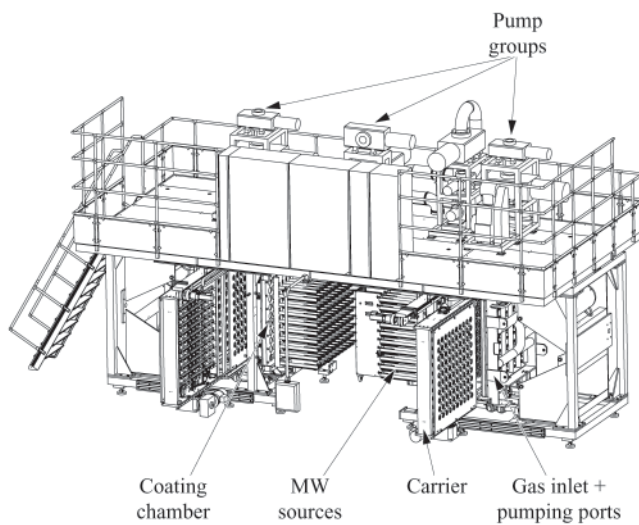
Sketch of the above machine from the (un)loading side showing the two coating modules with the left vacuum chamber opened and the carrier being moved out.
